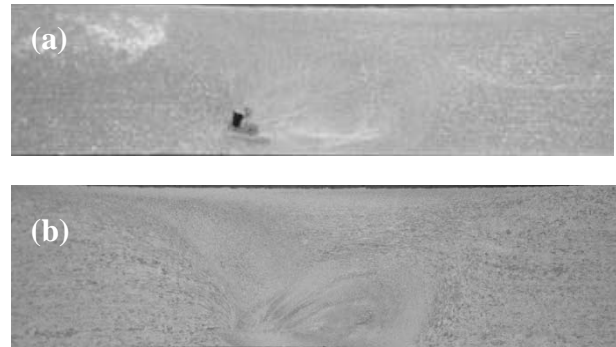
a) weld presenting a defect type tunnel; b) weld without defects identifiable by microscopy.
